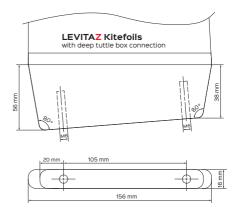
Deep tuttle box connection to the board/Symbol photo
